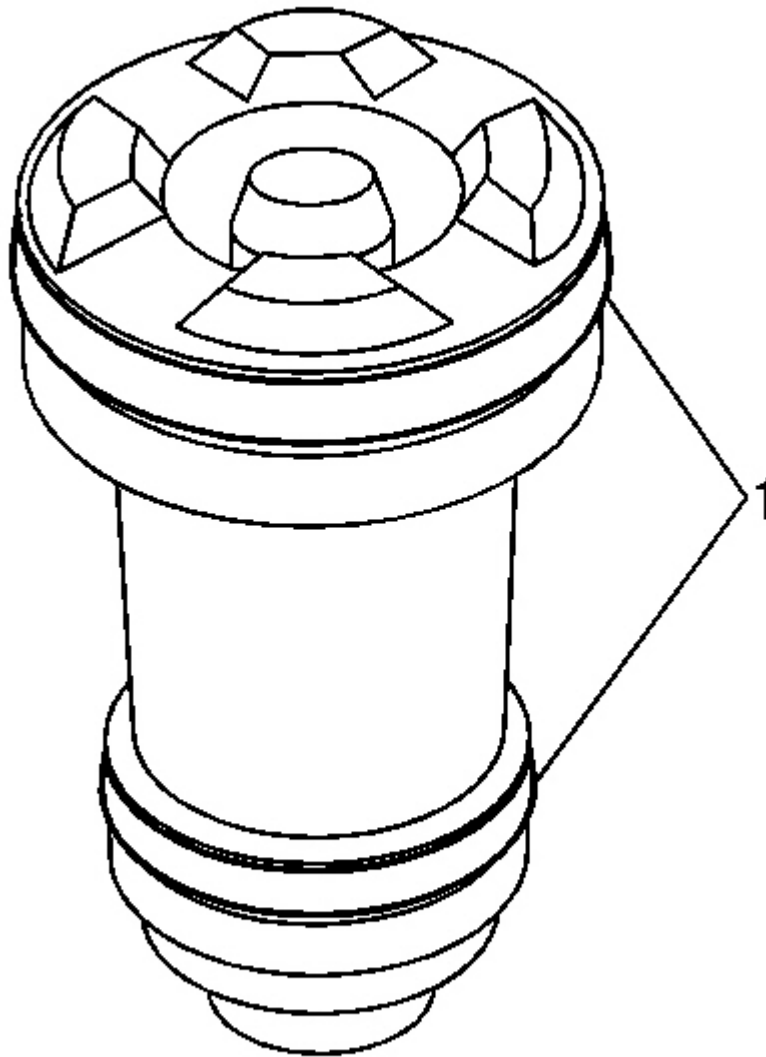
O-Rings, O/D & 2nd Brake Accumulator Piston
